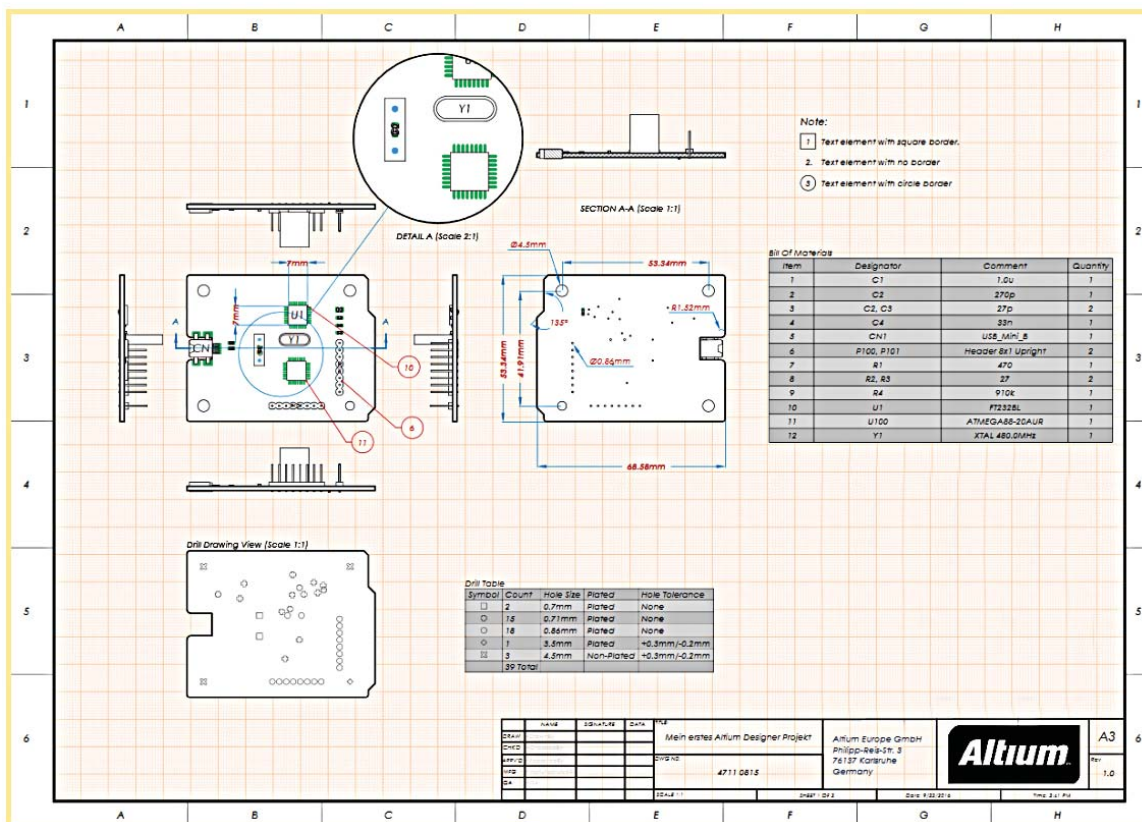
Example drawing from Draftsman with details for the PCB assembler.
